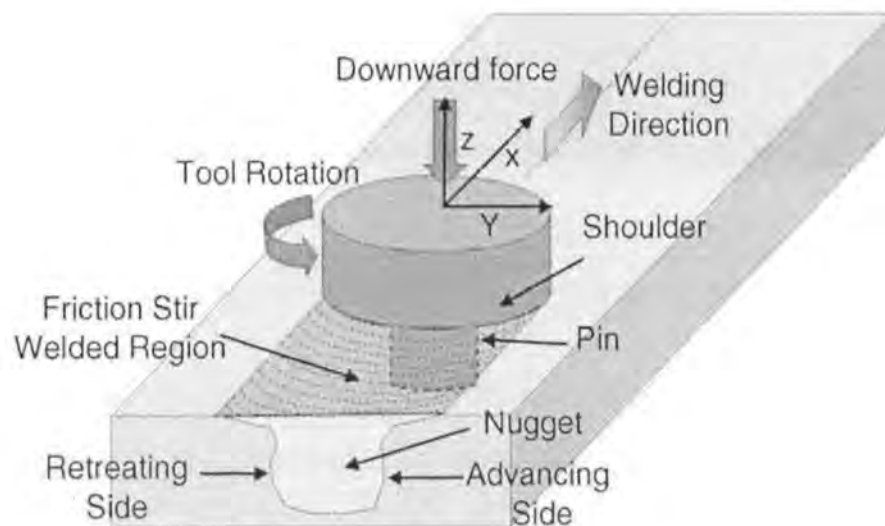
Schematic drawing of friction stir welding^[13].
